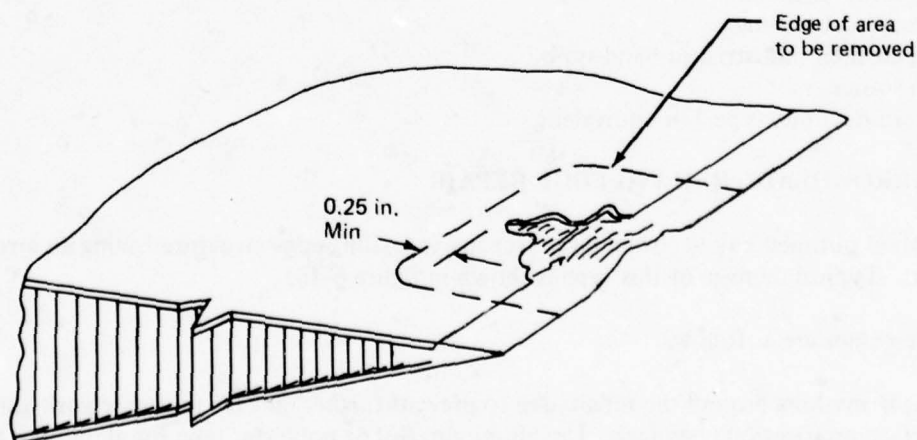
Layout of Cutting Pattern for Damage Removal
